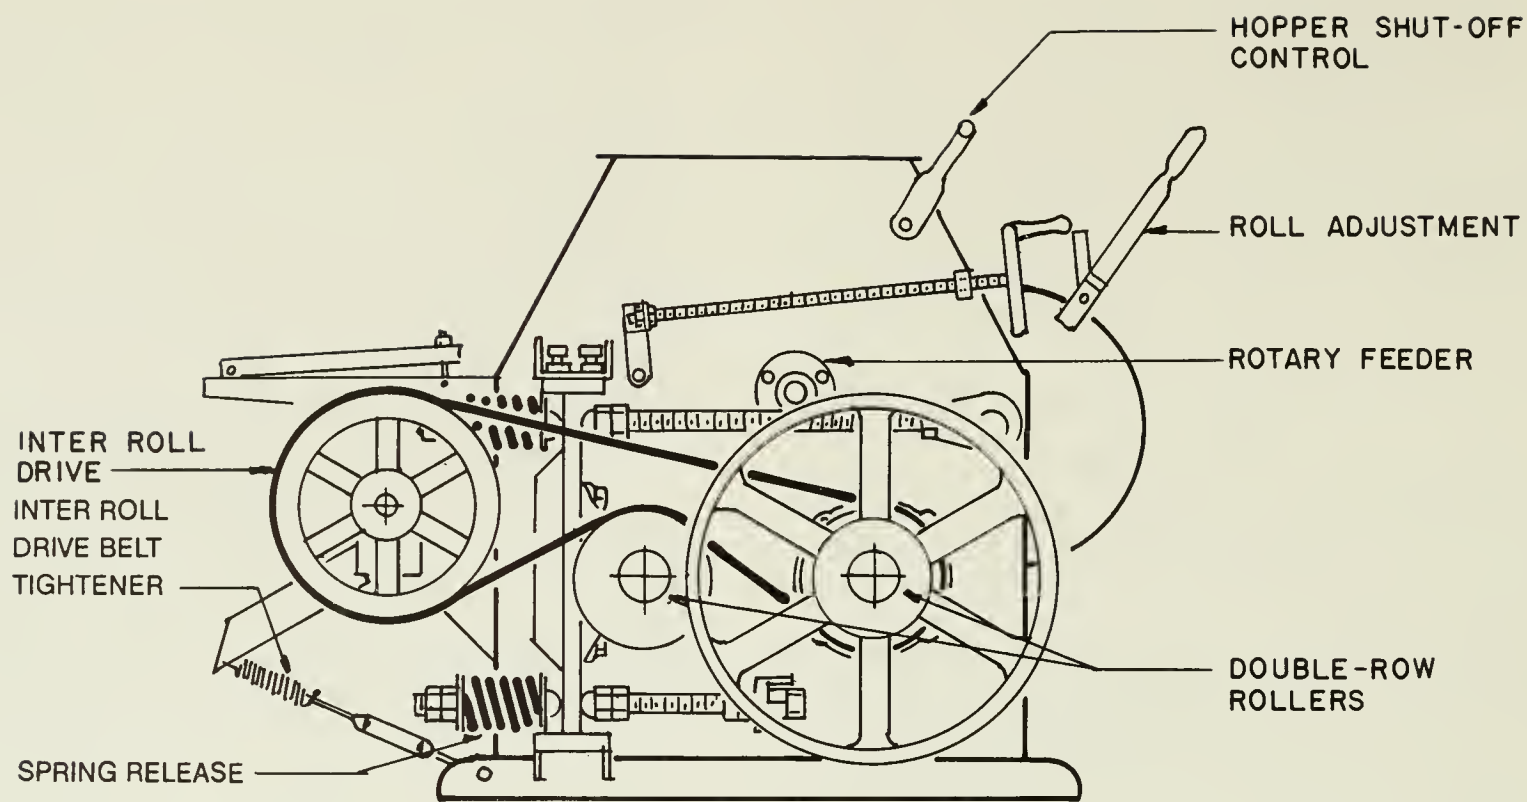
Side view of an industrial roller mill. Source: Roskamp Manufacturing, Inc.
